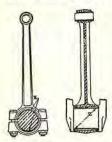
This illustrates how the crank-pin bearing wears. At (X) is shown natural wear, while at (Z) is shown the wear caused by a bent or twisted rod.
